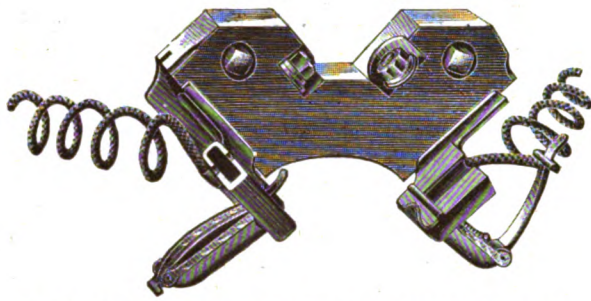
BRUSH-HOLDER OF THE STEEL MOTOR COMPANY, JOHNSTOWN, U.S.A.
